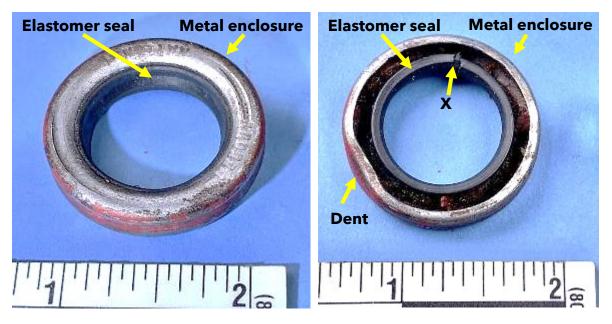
View of the disassembled moisture seal assembly. The metal enclosure portion was stamped "NATIONAL" and "180954". The elastomer seal was in the area indicated by arrow "x" and was cut by the NTSB Materials Laboratory to facilitate disassembly. The dent was present in the as-received condition.
